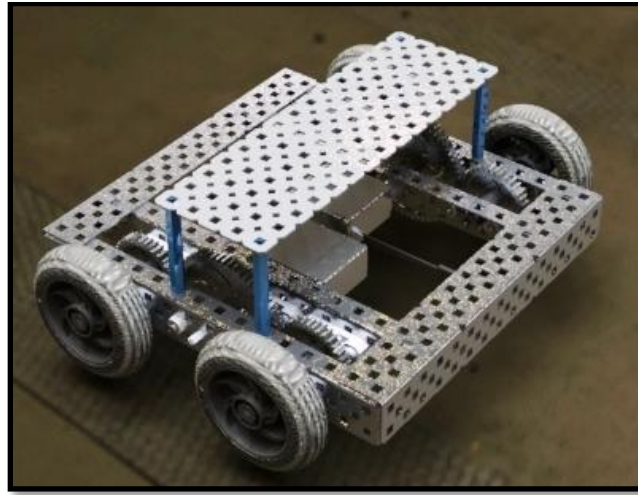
DDS SolidWorks Assembly of a Robot Vehicle Using Pre-Drawn VEX parts (DDS Photo Works rendered)
